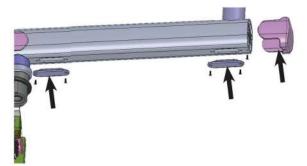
Fix end cap and bottom caps(M3x6 self tapping Counter sunk screws )Use screw driver.
